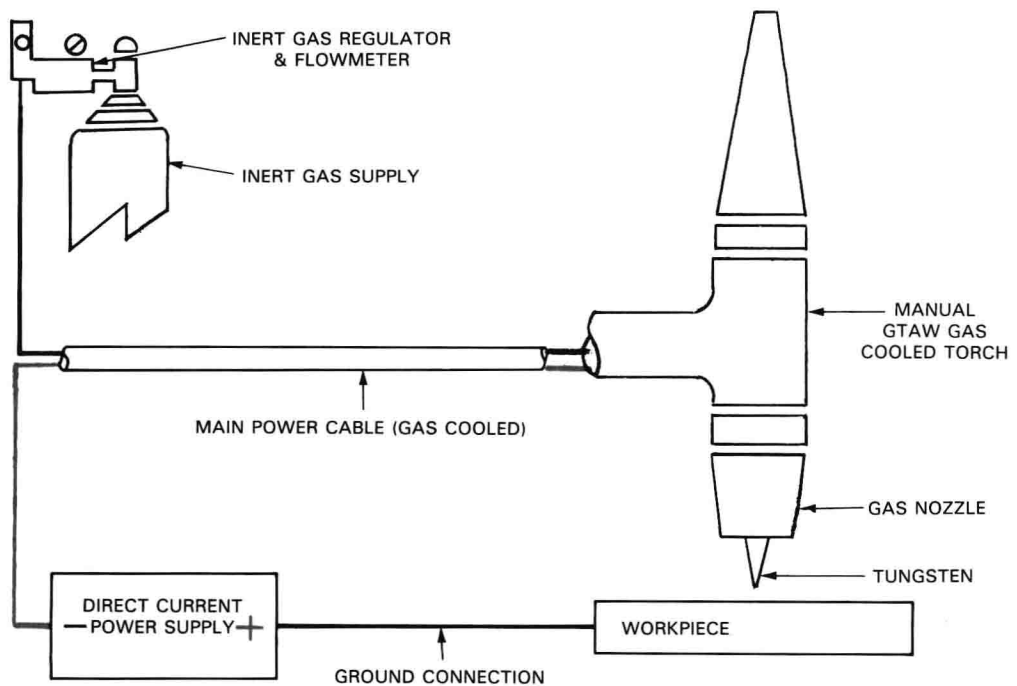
Basic components for a simple GTAW system to weld steel, stainless steel, inconel, etc.
